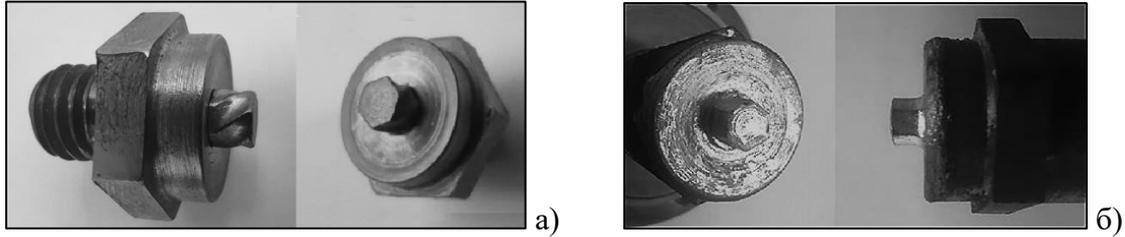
General view of the tools used in the study: (a) tool P1 with a concave shoulder and a hexagonal cross-section pin with left-hand threads; (b) tool P2 with a flat shoulder and a hexagonal cross-section pin without threads
